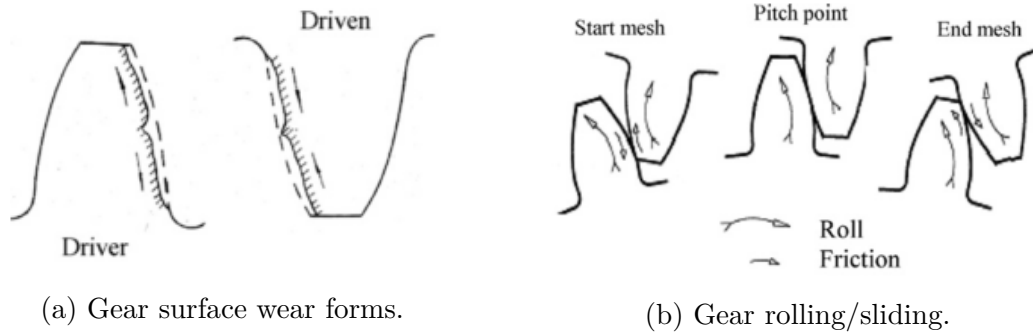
Resulting gear surface wear and gear rolling/sliding [20].
